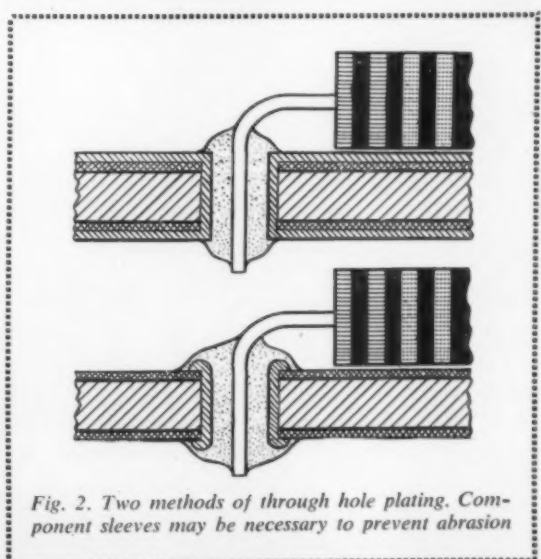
Two methods of through hole plating. Component sleeves may be necessary to prevent abrasion
